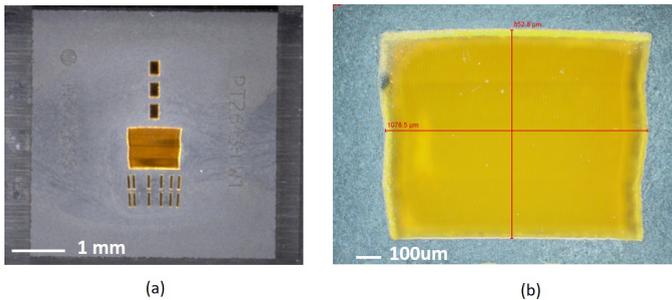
The results of the molded encoder package with 16 optical windows. (a) Top view of the 5x5 QFN package after dicing. (b) Closed-up view under microscope of the center window.
